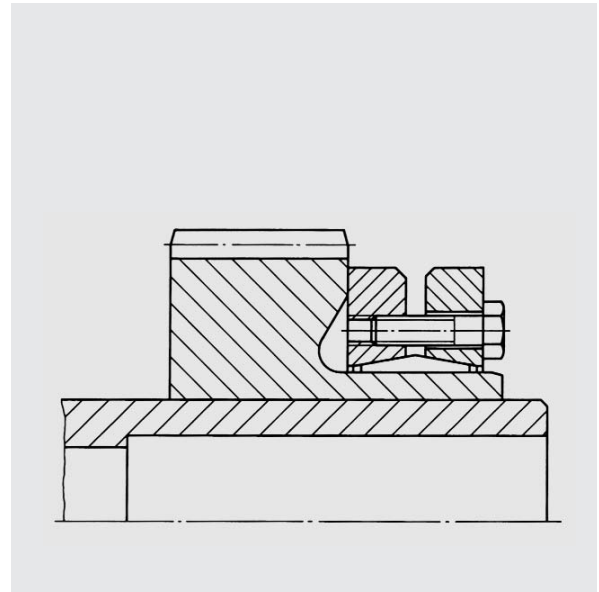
· RINGFEDER® Shrink Disc Adaptor flange type FK RAG
